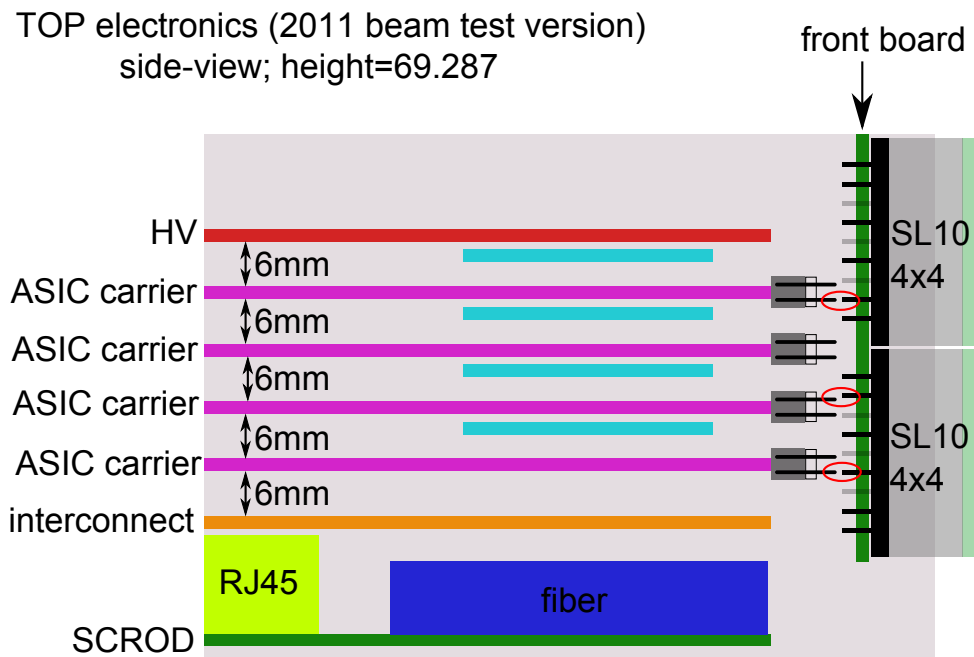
side view of single iTOP electronics module with 6mm board-stack connectors, showing mechanical conflicts with SL10 pins (conflicts indicated in red)
